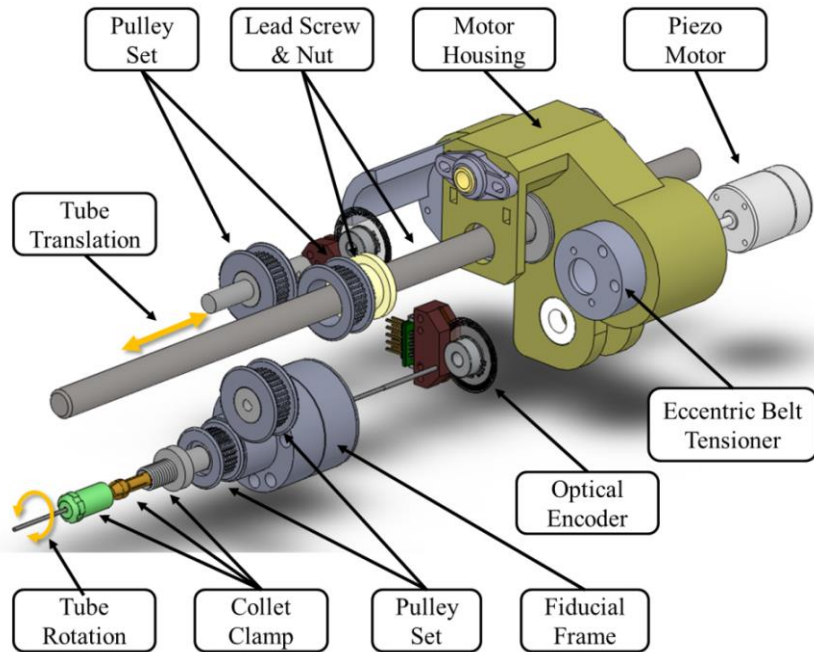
6: Exploded view of a 2-DOF actuation unit module
